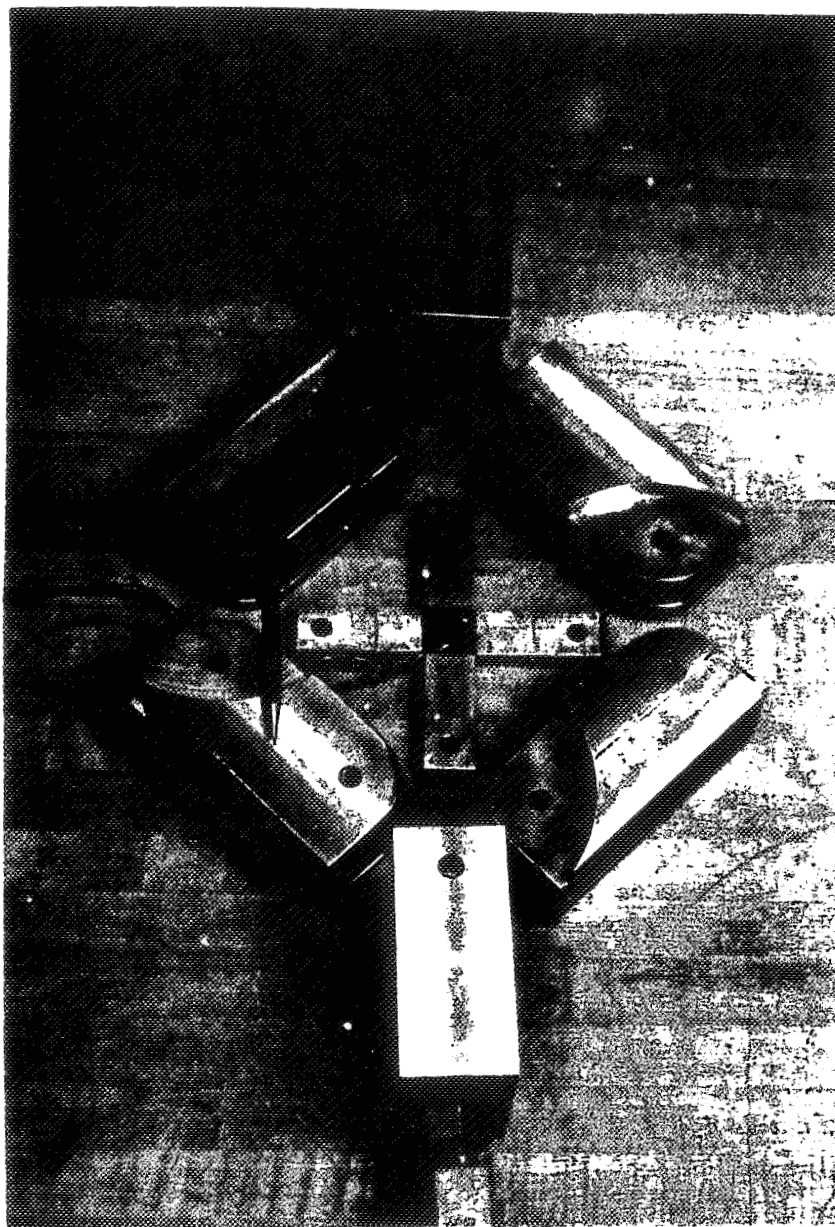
The Unassembled Cruciform Test Fixture and Specimen
